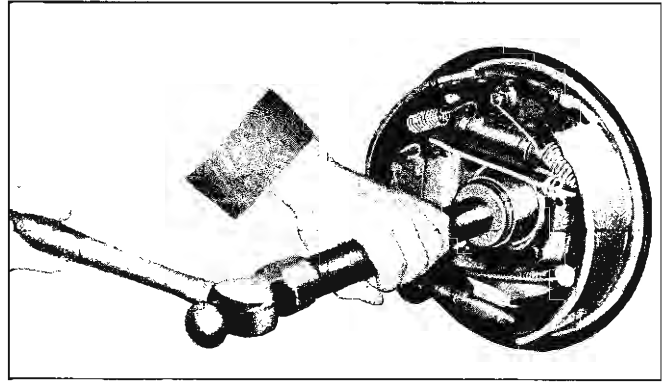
Wheel Bearing and/or Oil Seal Installation
